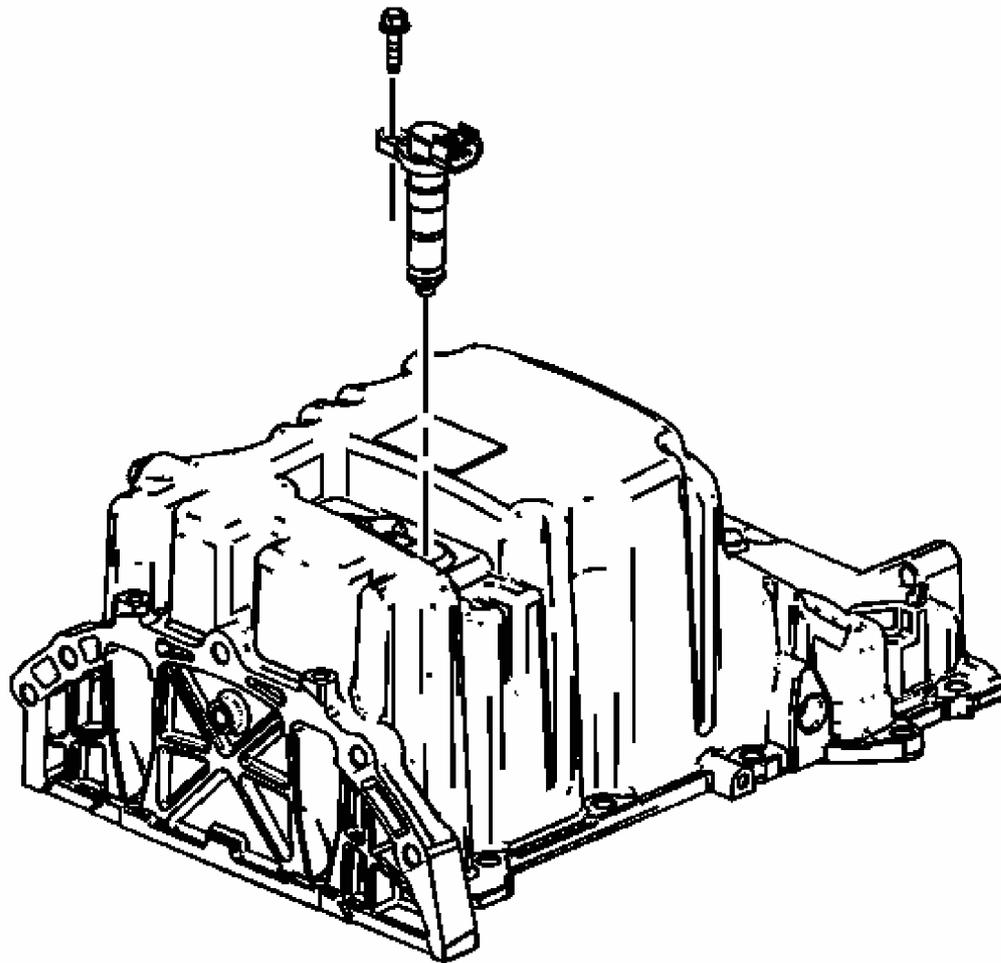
Removing & Installing Oil Level/Condition Sensor
